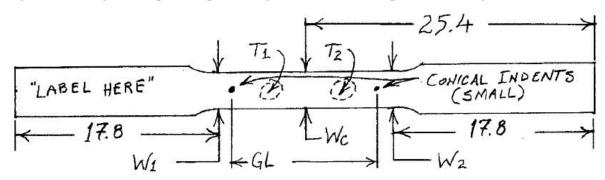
Sketch of the tensile samples showing locations of dimensional measurements.
